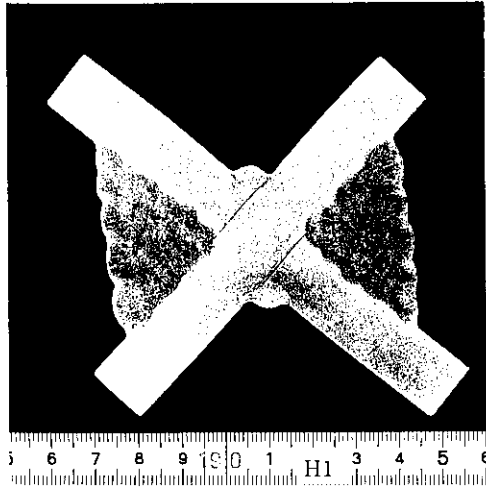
Fracture appearance of specimen after restraint weldment test in molten zinc
